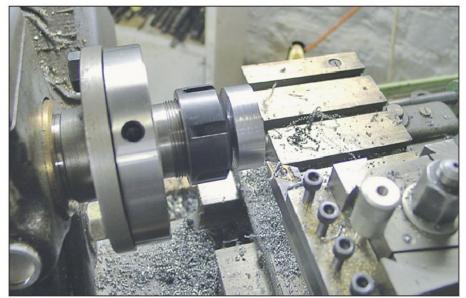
Extension shaft mounted in ER32 collet chuck for concentricity.
